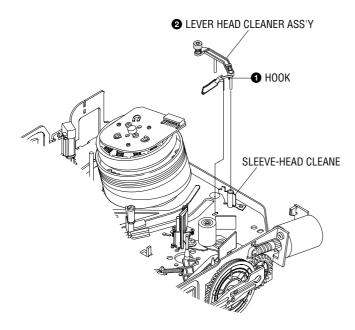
Lever Head Cleaner Ass'y Removal
